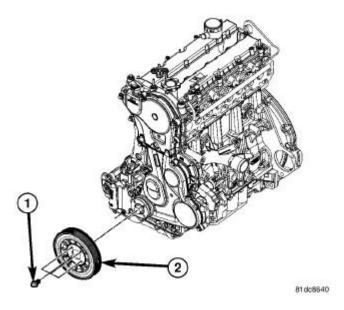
Crankshaft Damper Courtesy of CHRYSLER LLC
